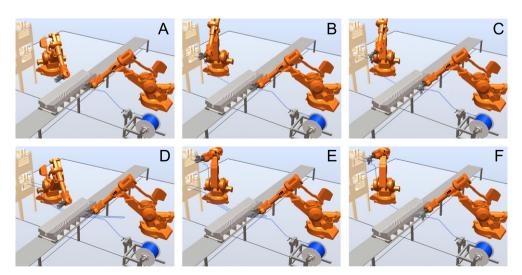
A summary of the suggested robotized cable winding method, with one of the two robot pairs in one production cell. The cable is delivered from the cable drum holder and a cable parking is used to enable cable winding through two slots simultaneously. The process goes from step (A)–(F) and is repeated until all the slots are wound, after which a new cable is wound until the whole stator section is wound.
